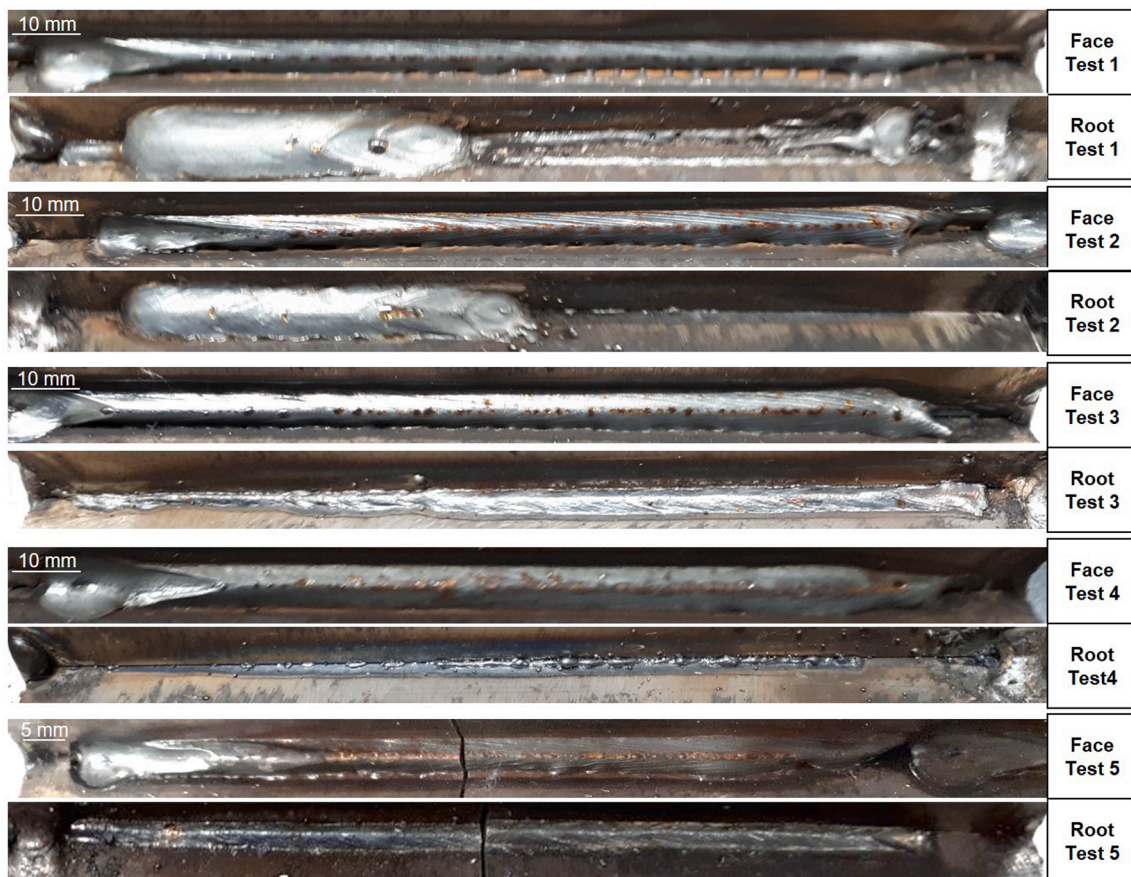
Macrographic images of face and root sides of HLAW welds obtained in Tests 1–5.
